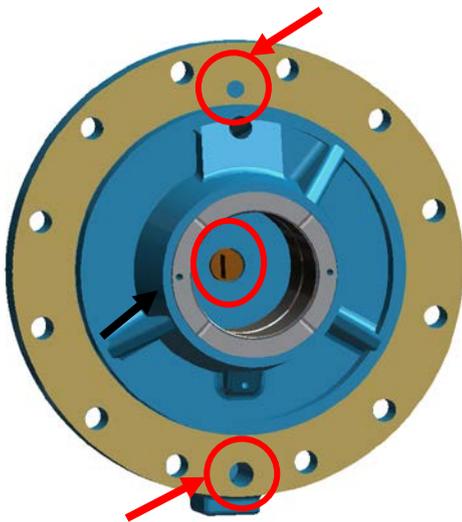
Preparing for Bearing Housing Mounting Fig.9.9 Reassembly of Bearing Housing
